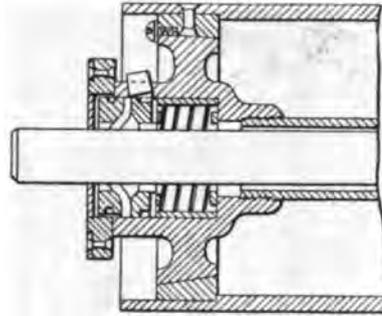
Latest Type of Pantograph Roller Designed for use with Roller Bearing
